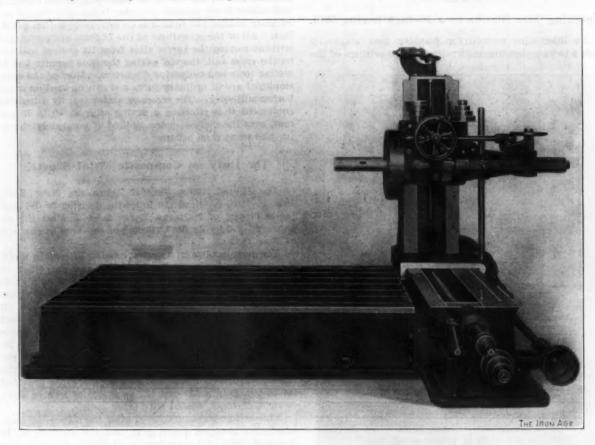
The Espen-Lucas Horizontal Floor Boring, Milling and Drilling Machine.
